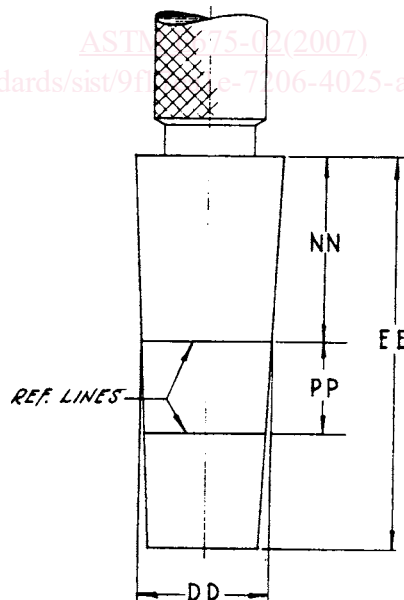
Master Plug Gage for Single Oblique-Bore Stopcocks
